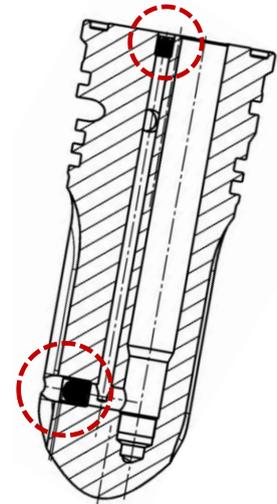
Cut-view of spark plug sleeve with encircled closing plugs
